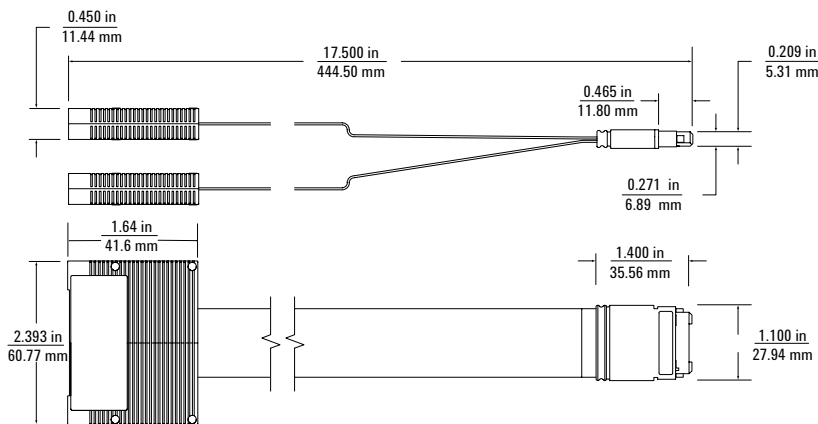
E5346A, E5351A, E5339A mechanical dimensions
